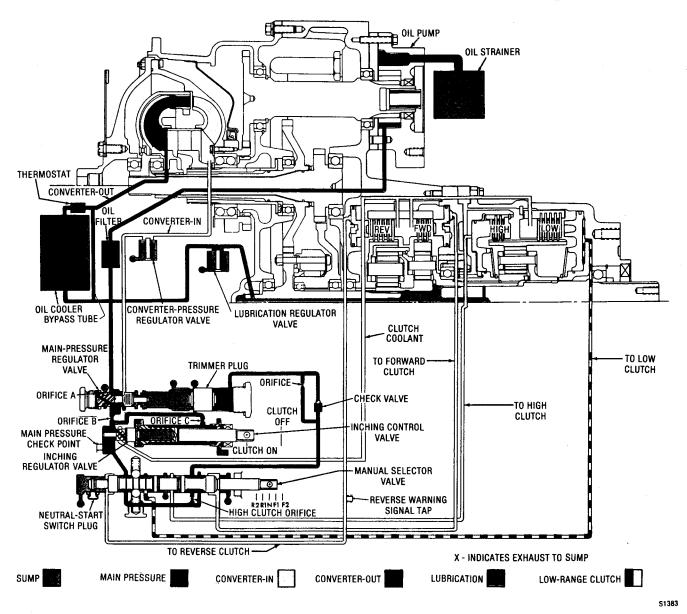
TRT 2221-3, TRT 2421-3 hydraulic system for underdrive model with inching control
